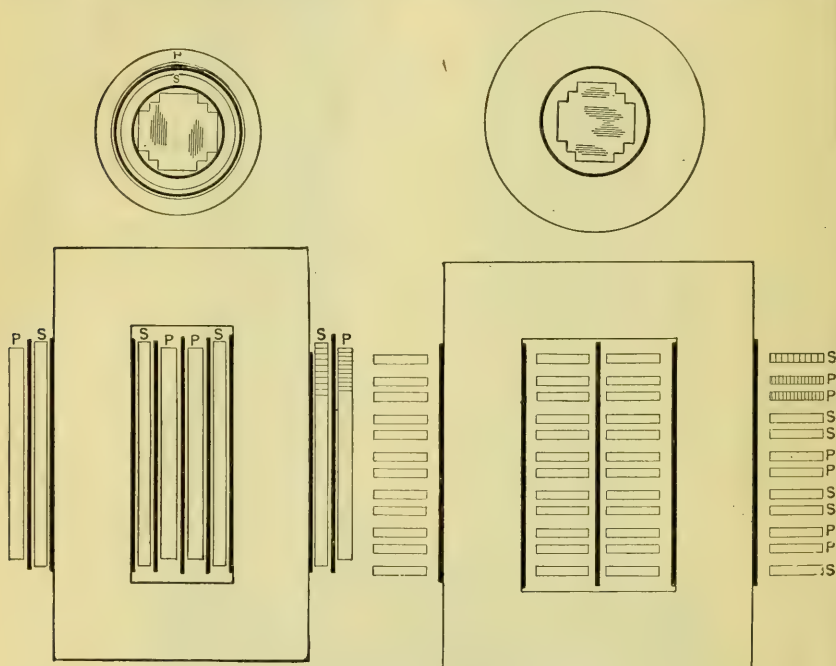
Concentric Cylinder Coil Windings for Core-type Transformers.
